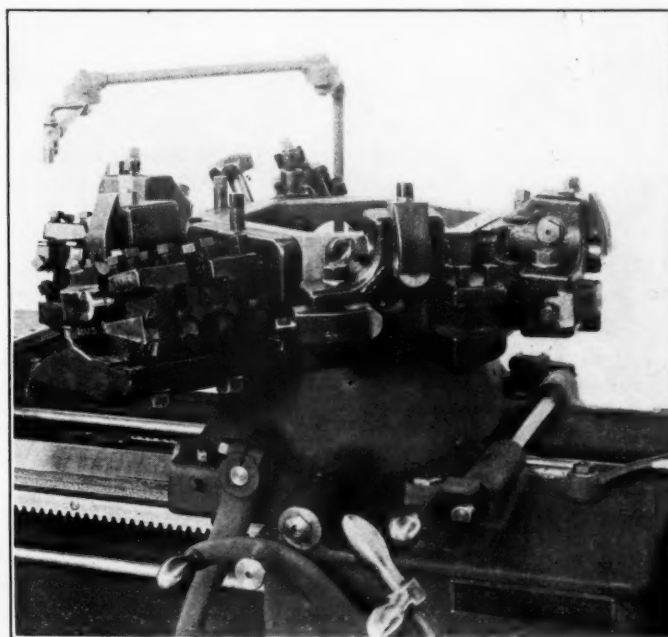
Hexagon Turret and Saddle with Bar Tools
